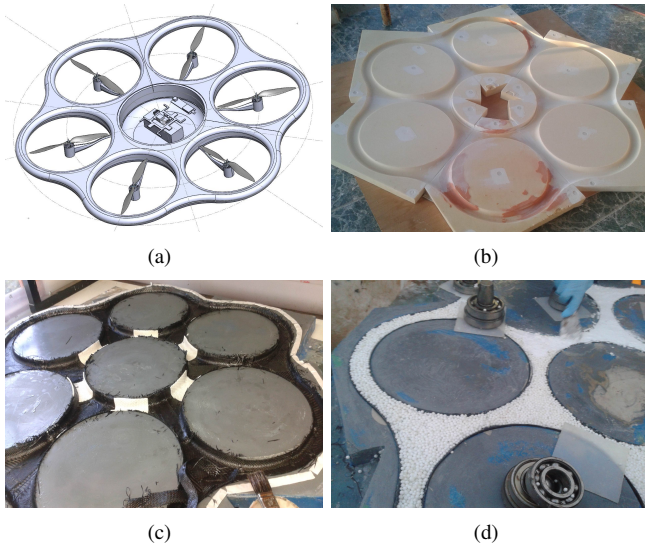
The UAV design process. (a) The structure design in SolidWorks. (b) The negative mold machined on a CNC. (c) The carbon sheet applied over the mold. (d) The filling with microspheres
